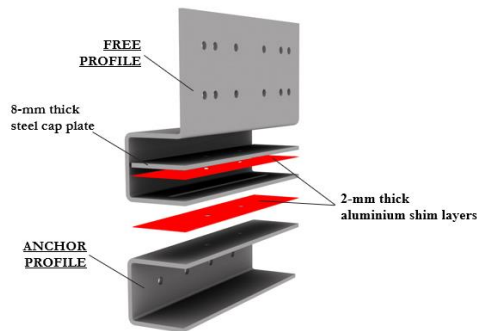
Addition of a steel cap plate and two aluminium shim layers in the STD configuration of the damper.
